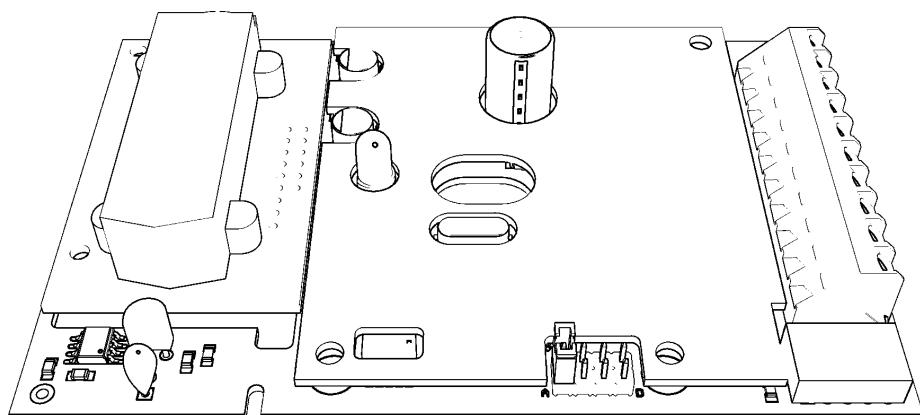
View of the printed circuit board of the wall-mounted version of the converter.
